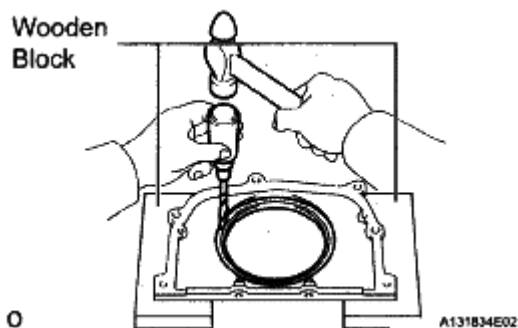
Tapping Out Engine Rear Oil Seal Using Screwdriver & Hammer
